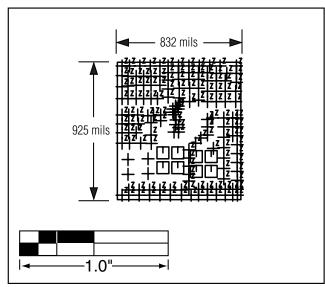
MAX2648 EV Kit PC Board Layout—Drill and Mechanicals
